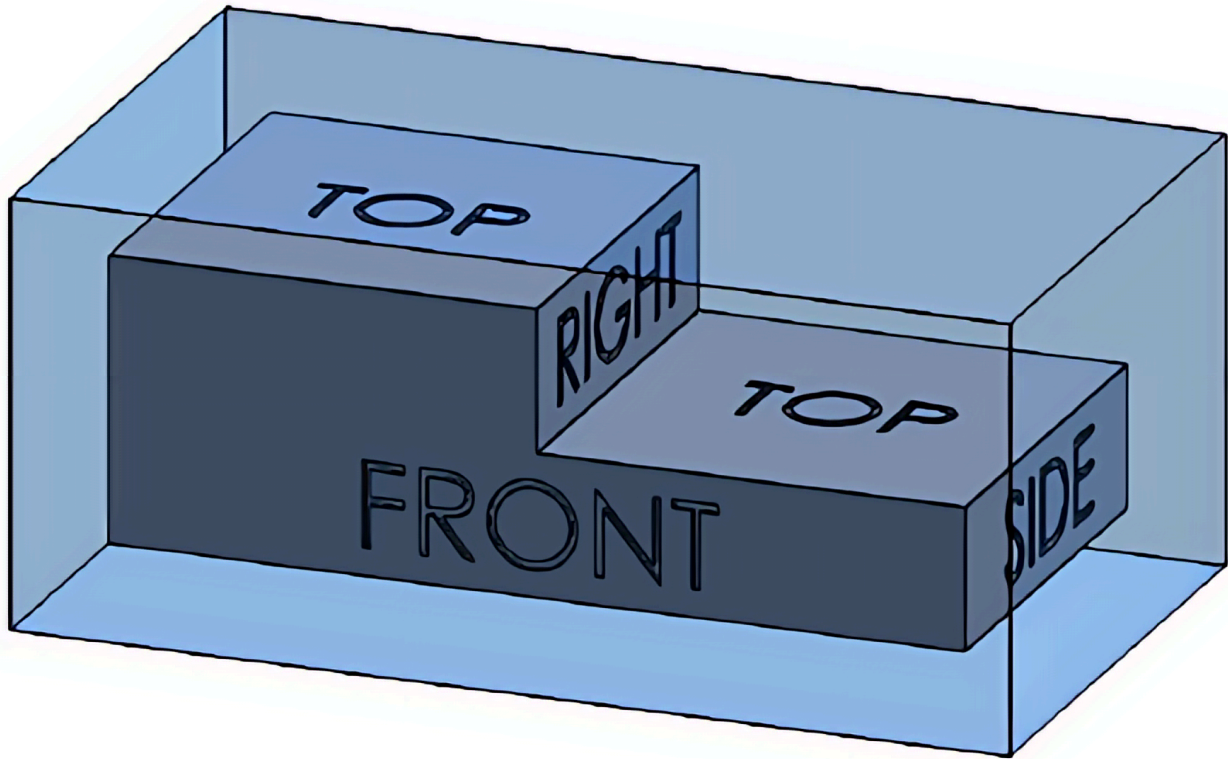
Part placed inside a clear box with views projected onto the six surfaces.
